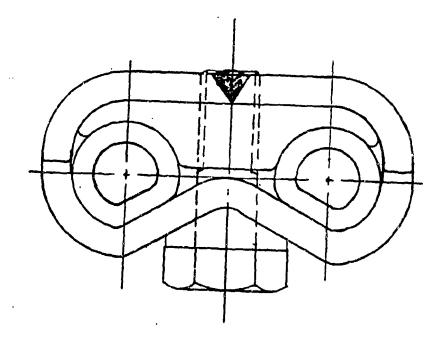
Clamp type end connector with pin flats stamped to size.
